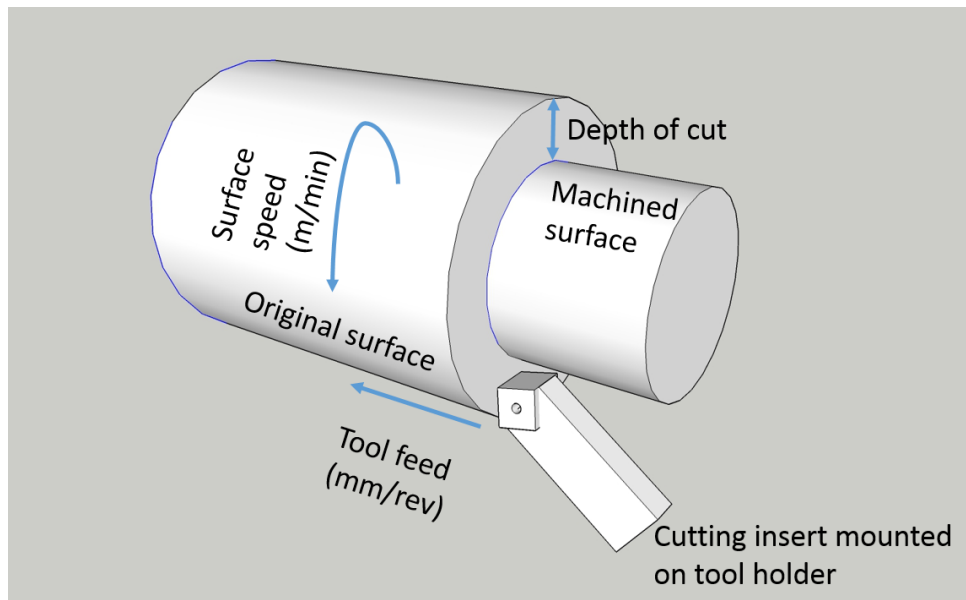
Schematic of longitudinal turning for a cylindrical workpiece material, redrawn after [100,104].
